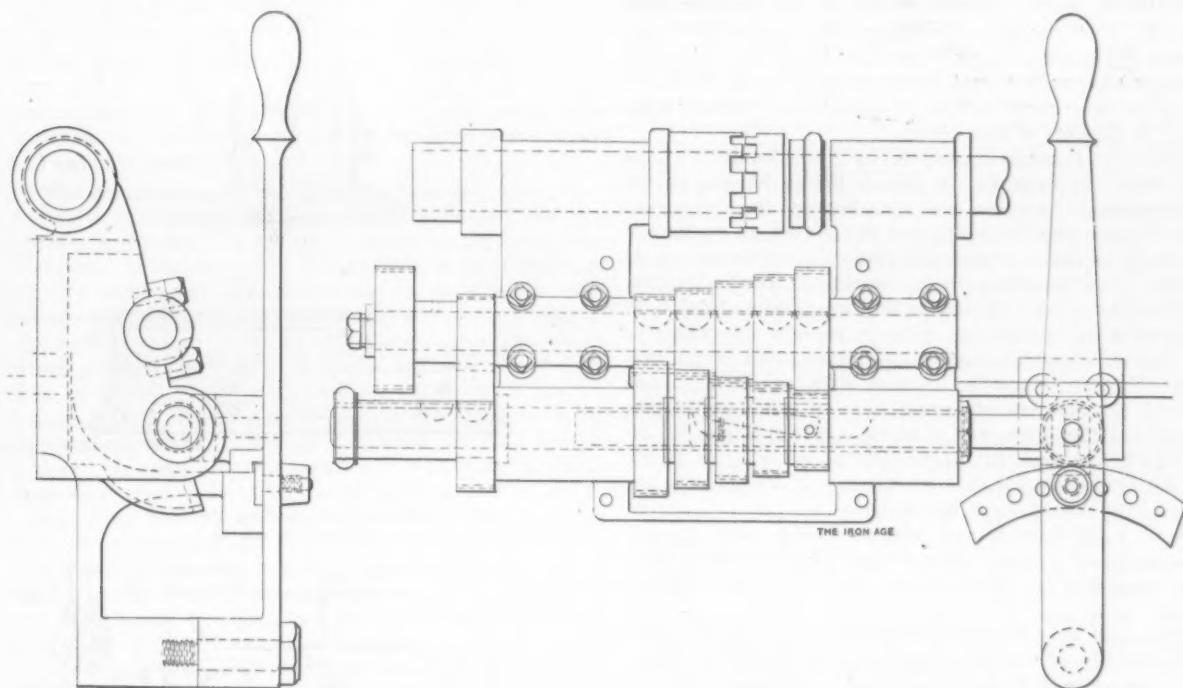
Detail of the Quick Change Feed Gear Mechanism of the New Blaisdel Lathe.
